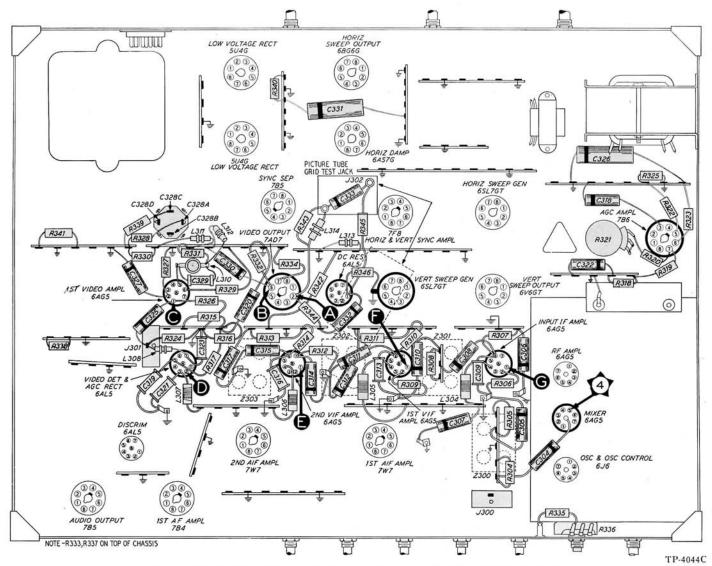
Bottom View of Chassis, Showing Section 3 Test Points
